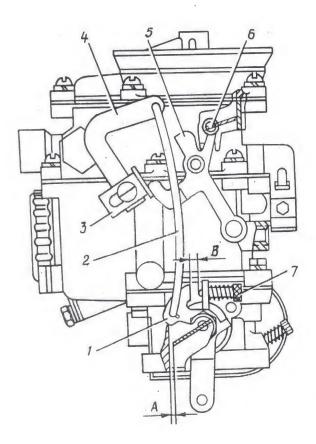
ADJUSTMENT OF THROTTLE OPENING WITH CHOKE CLOSED
